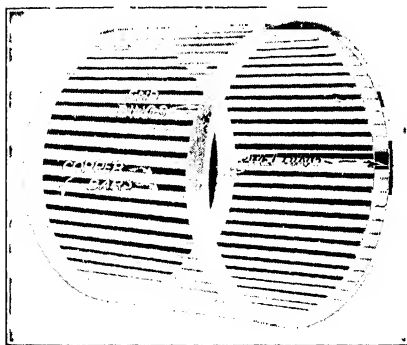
A Squirrel Cage Rotor as It Would Appear When Removed from the Slots of the Laminated Sheet Steel Rotor Core and Reassembled
